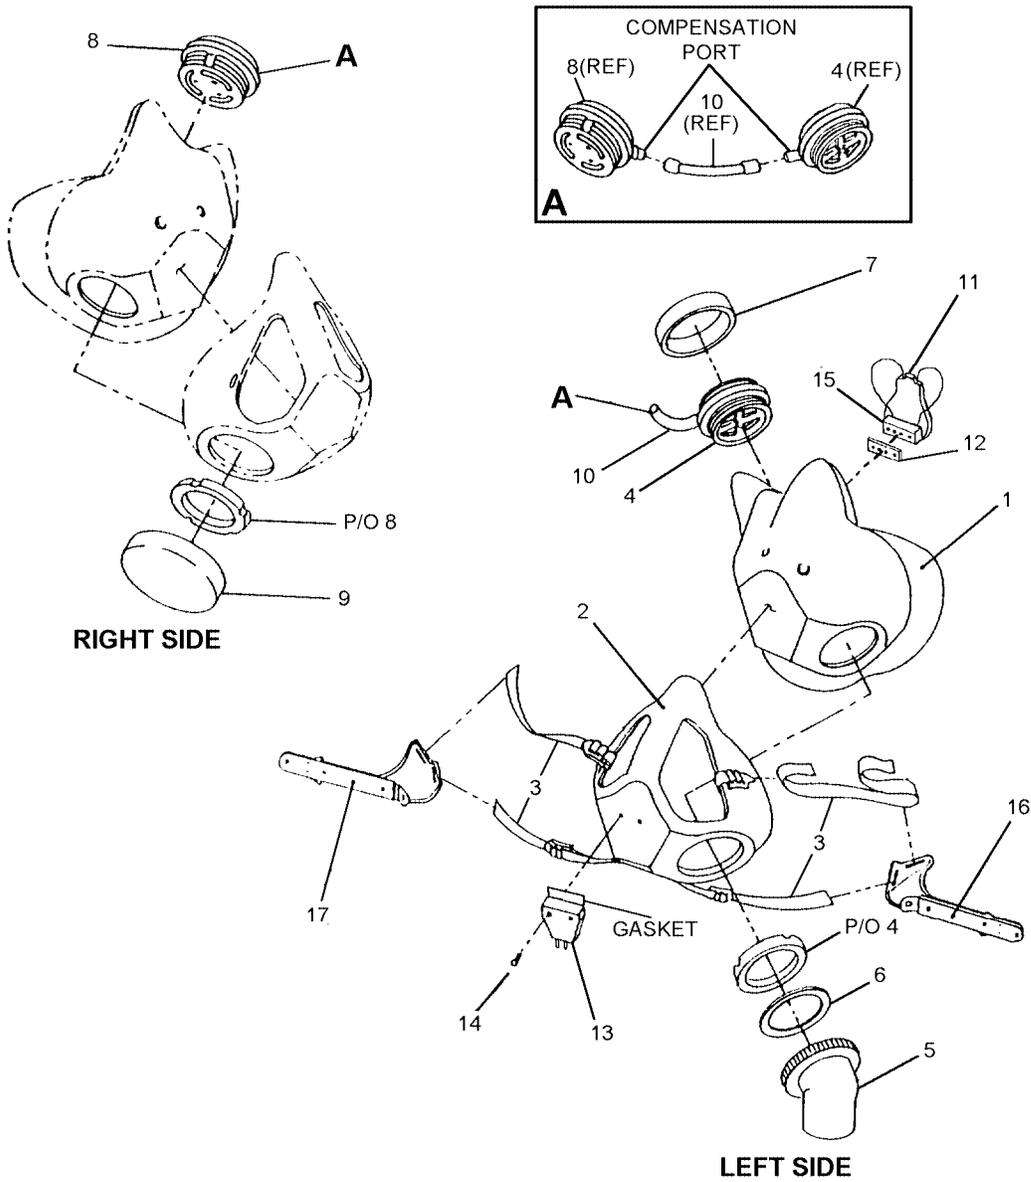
MBU-24/P22P-16 Oxygen Mask Assembly (Sheet 1 of 2)
